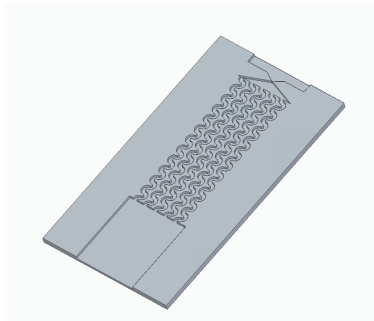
Example CAD model of a VLM thruster chip with nozzle. The glass layer was removed for clarity.
